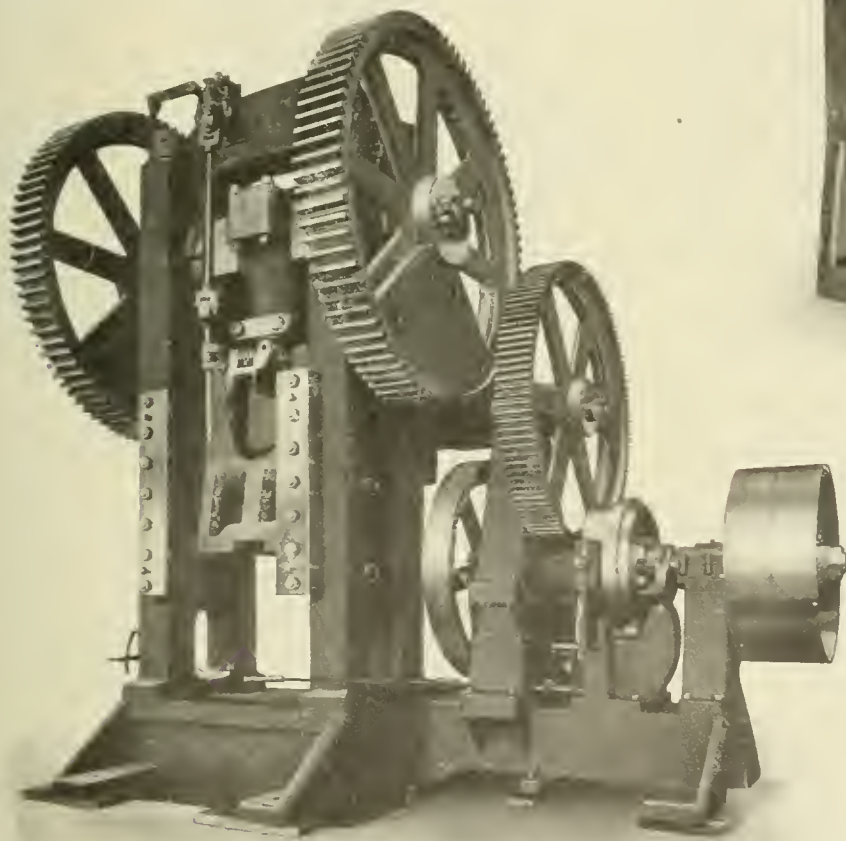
275,000-pound Press, built by the Toledo Machine & Tool Co.
